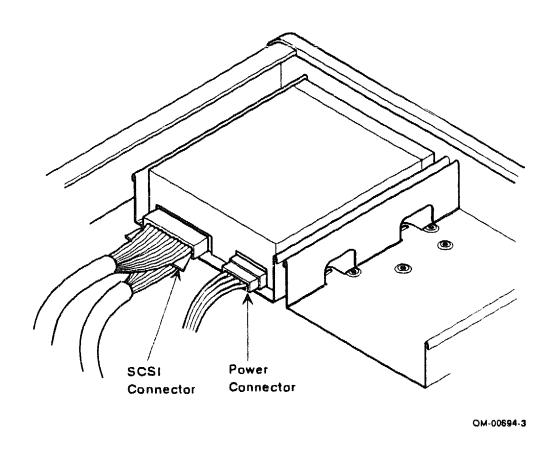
SCSI Device Rear Connections (5.25-Inch Mounting Tray)
